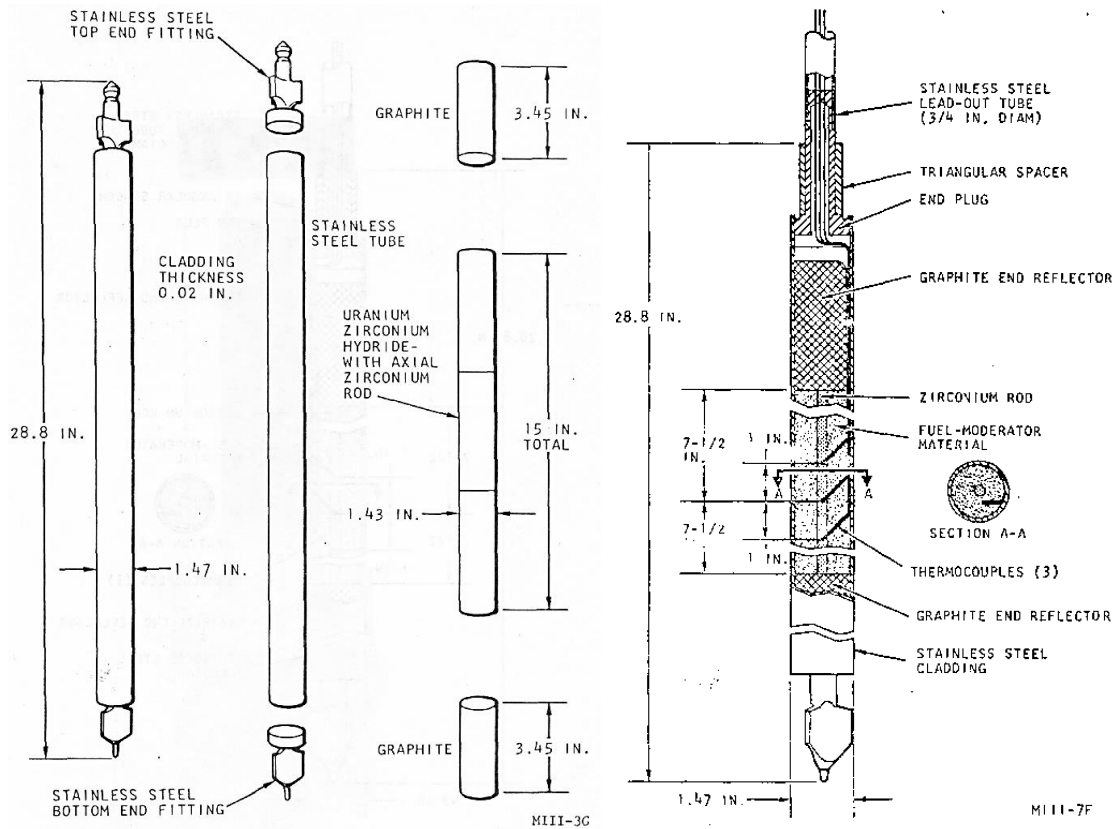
TRIGA stainless steel clad fuel element with end fittings
